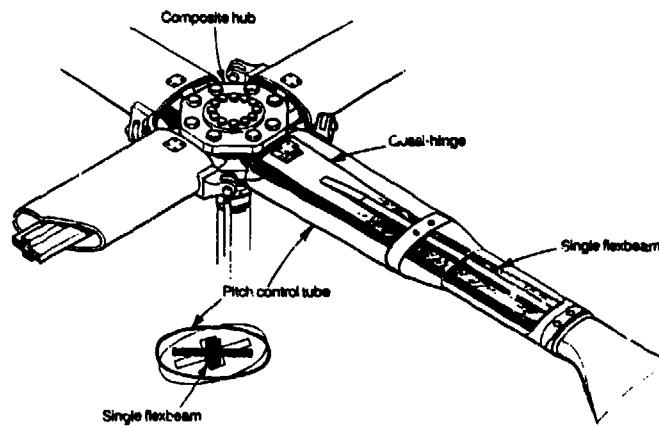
BEARINGLESS ROTOR HEAD OF MBB
